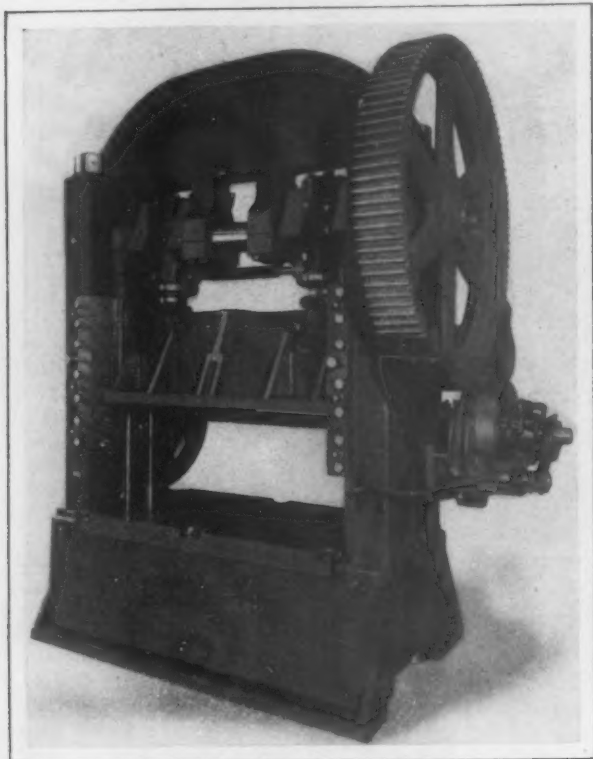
A Medium Size Double-Crank Press with a Gear Ratio of 27 to 1 Built by the E. W. Bliss Company, Brooklyn, N. Y.
